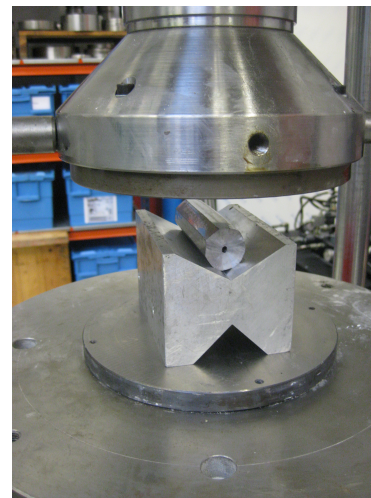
Die tool for simulation of forging with different lower die angles.
